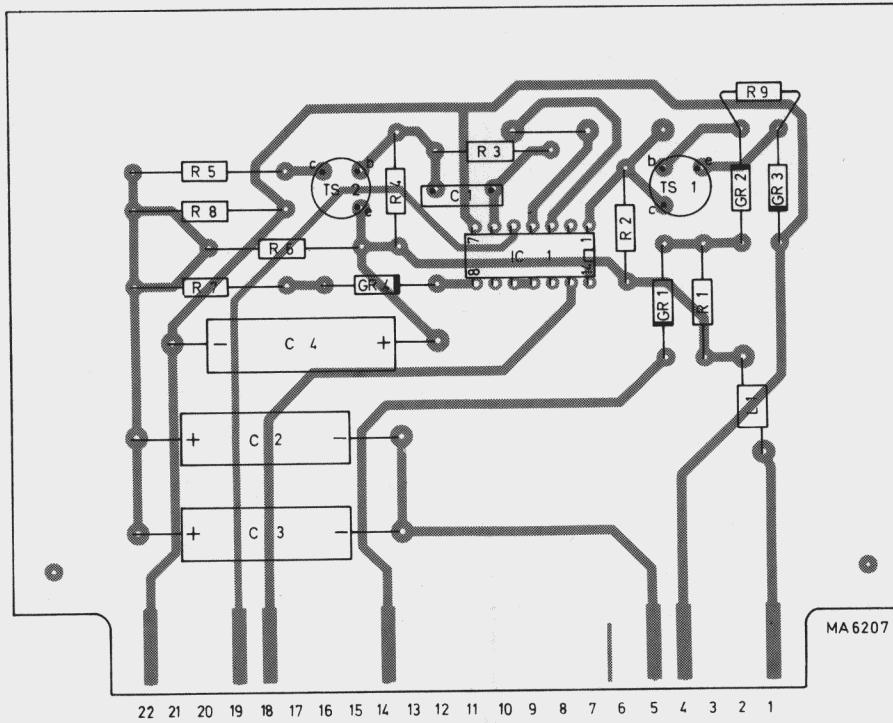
Printed wiring board, test output amplifier, unit 15A
